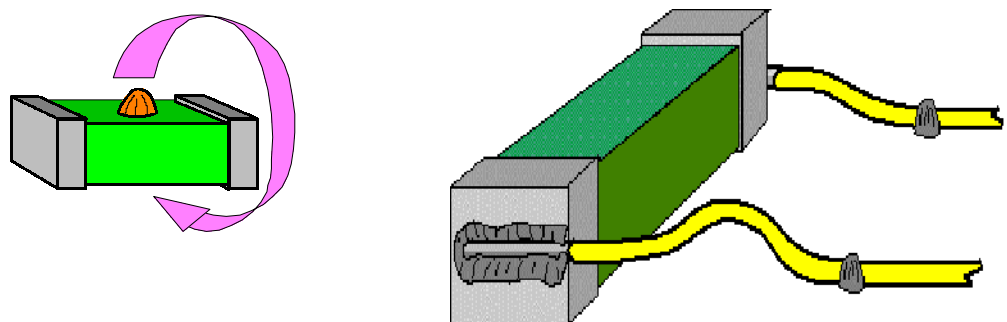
Addition of a wire link onto metallized cap of chips directly glued on PCB
